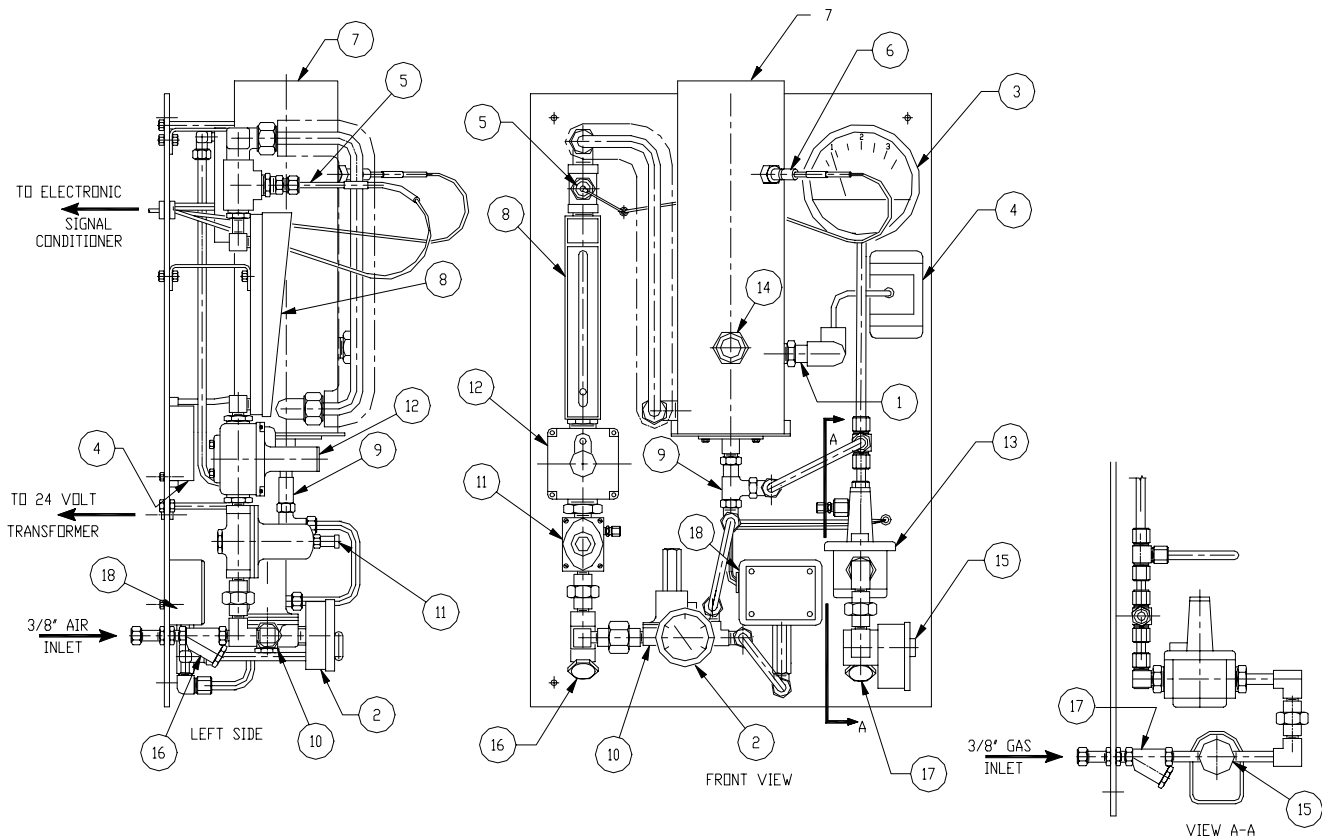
GA500WC Equipment Drawing...(burner chamber, regulators, etc.)
